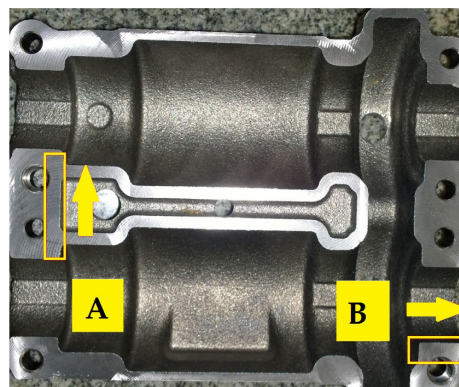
A view of the machined workpiece with sections A and B of the surface marked for SGT testing (the arrows indicate the direction of tool feed).
